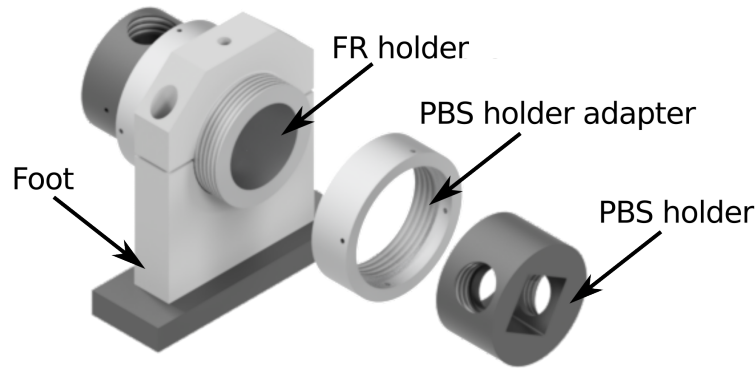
CAD model of the FI optical design. The design is divided into four sections: the PBS holder, the PBS holder adapter, the FR holder, and the foot. Optimizing the setup is achieved by rotating the PBS and FR holders.
